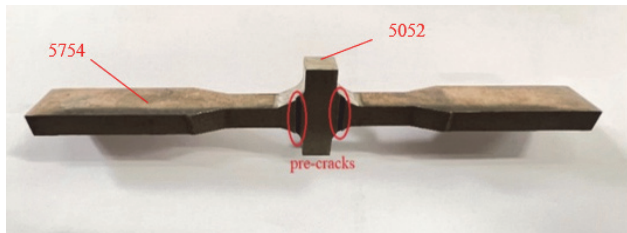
Cross-welded joint specimen with pre-cracks
